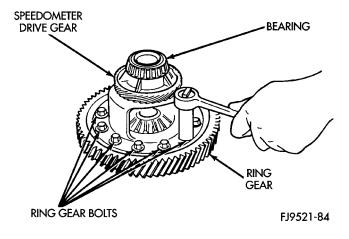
Remove or Install Ring Gear Bolts and Ring Gear
